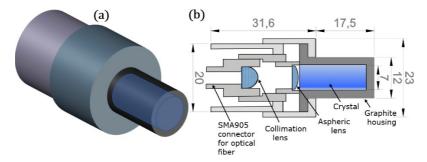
Single- crystal probe head- (a) 3D drawing, (b) Schematic drawing (dimensions are given in mm)
